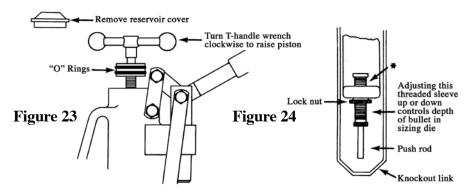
shows how to insert a stick of bullet lubricant into your machine. Remove the reservoir cap and place the T-handle wrench on the pressure screw as shown. Turn the wrench clockwise until the pressure piston is free from the threaded portion of the screw.
